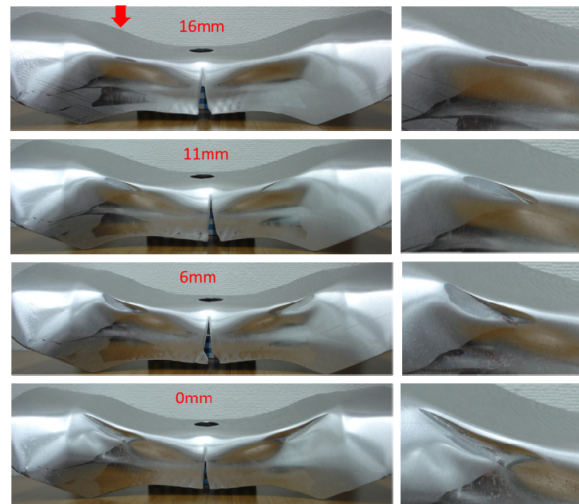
Press forming of unannealed aluminum plate by changing the slide position of 16 mm, 11 mm, 6 mm and 0 mm from bottom dead center. Red arrow shows the position of cross section of Figure 6.
